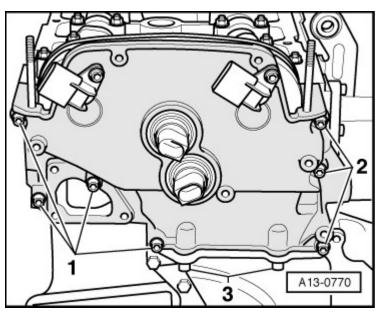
Identifying Cylinder Head Cover Bolts Courtesy of AUDI OF AMERICA, LLC
